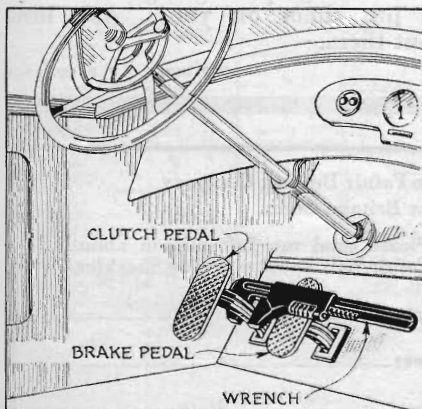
The wrench, clamped to the clutch, holds brake pedal while adjustment is made.
